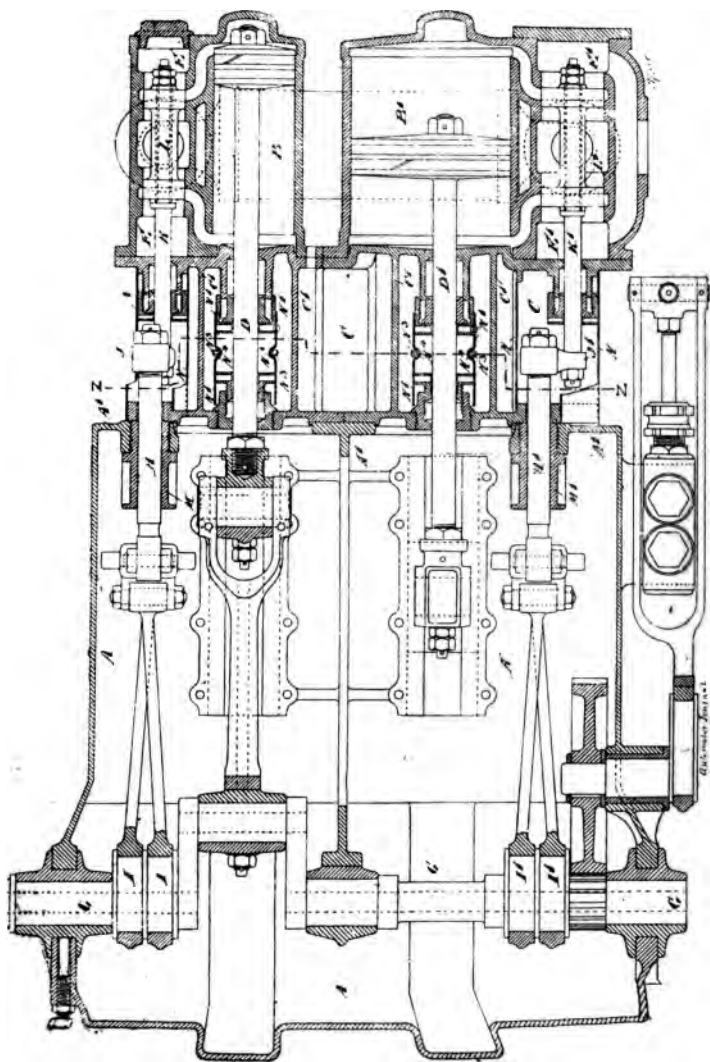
"LIFU" STEAM MOTOR: SECTIONAL PLAN.
